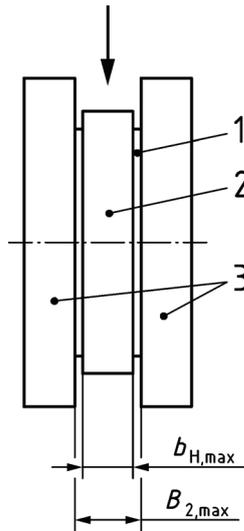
Example of checking method B for test force  $F = 6\,000\text{ N}$  (total force  $2 \times F = 12\,000\text{ N}$ )
